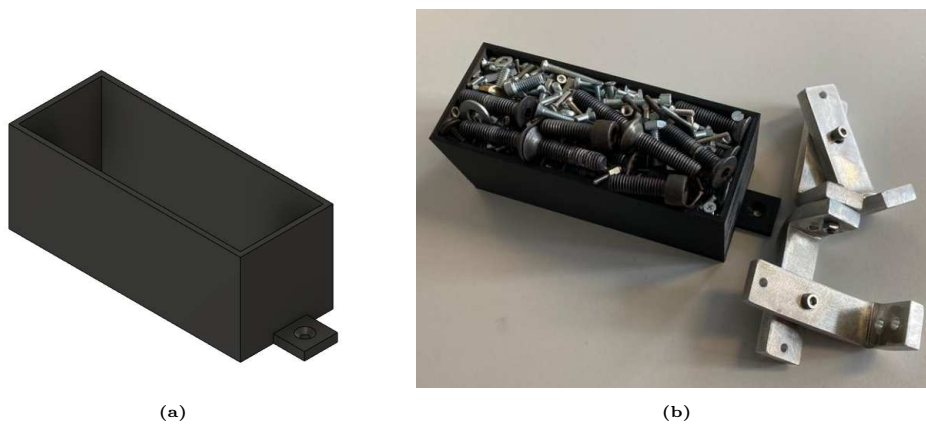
(a) CAD model of the 3D printed payload case and (b) filled case with additional aluminum brackets.
